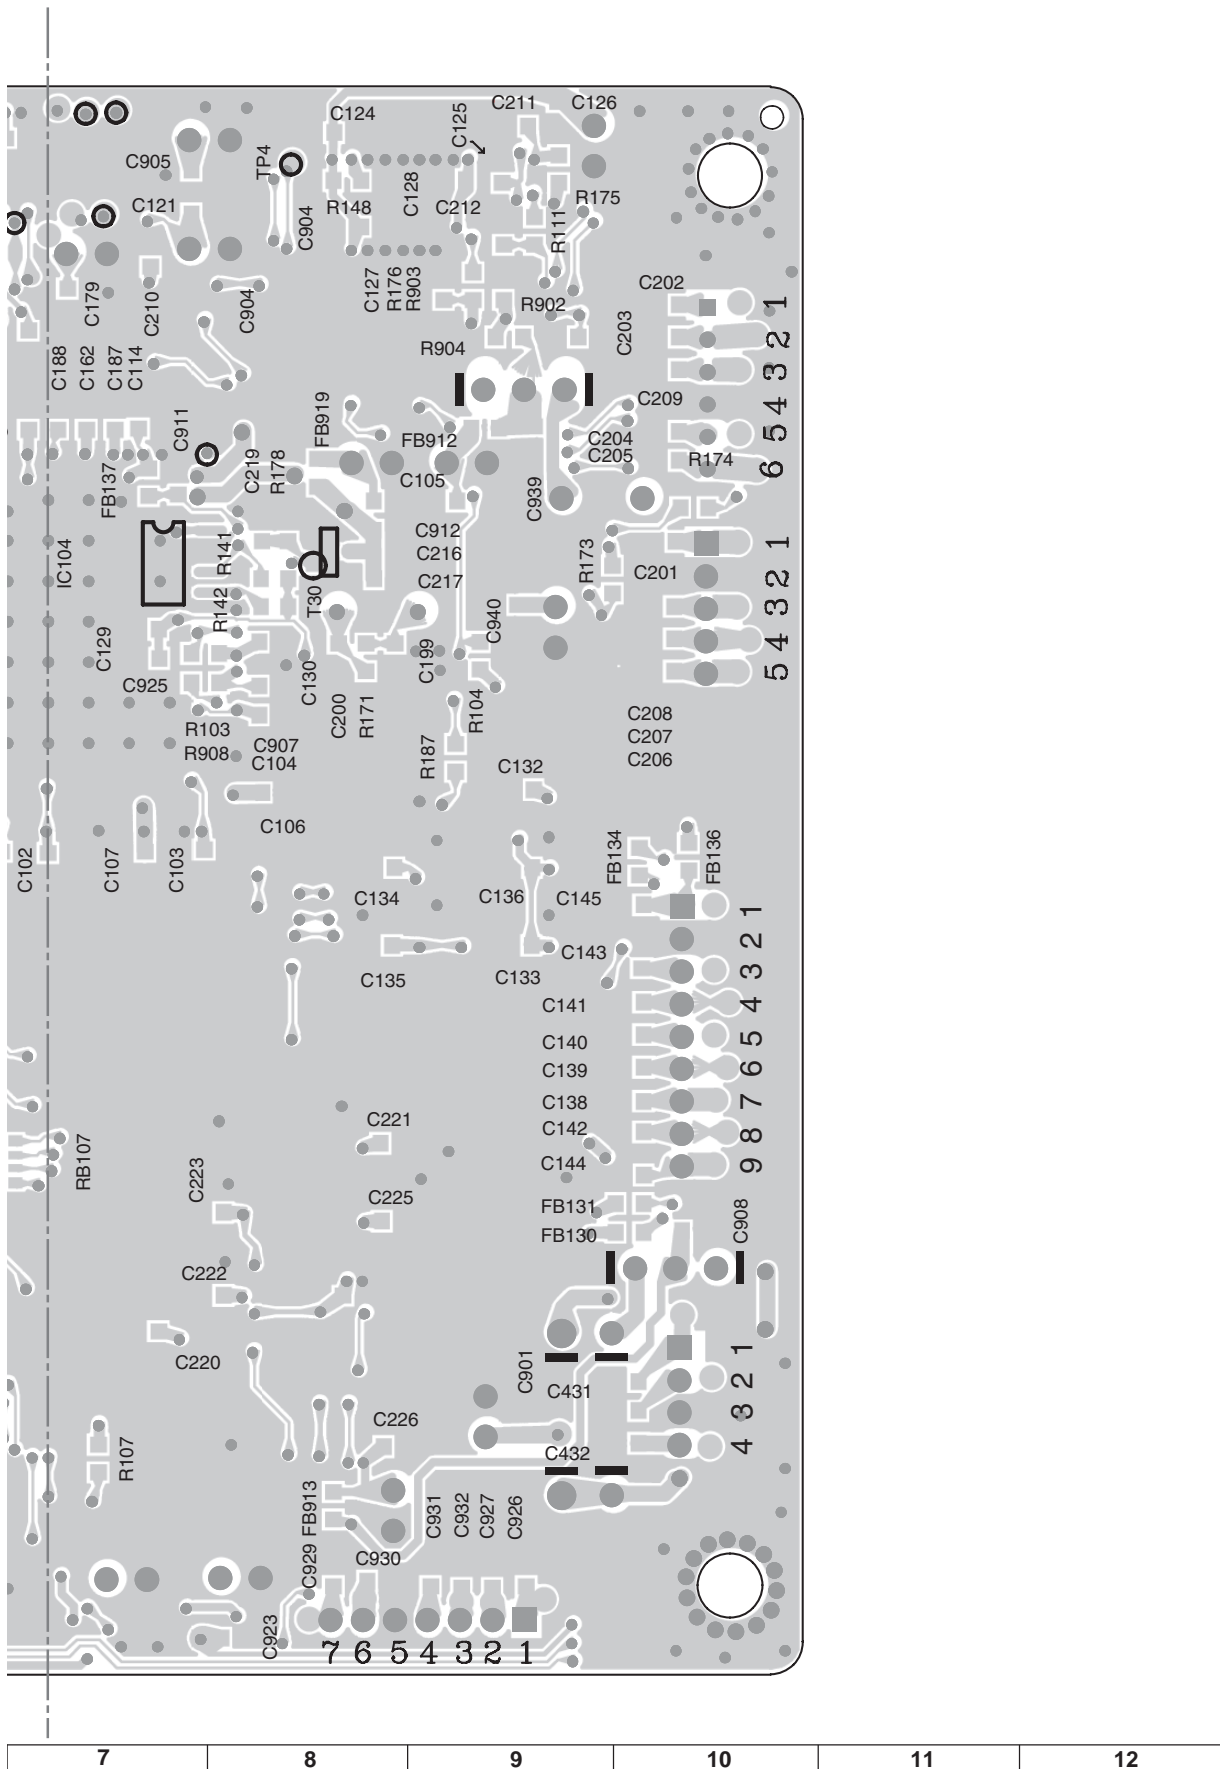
WIRING SIDE OF MAIN PCB (BOTTOM VIEW) (2/2)
